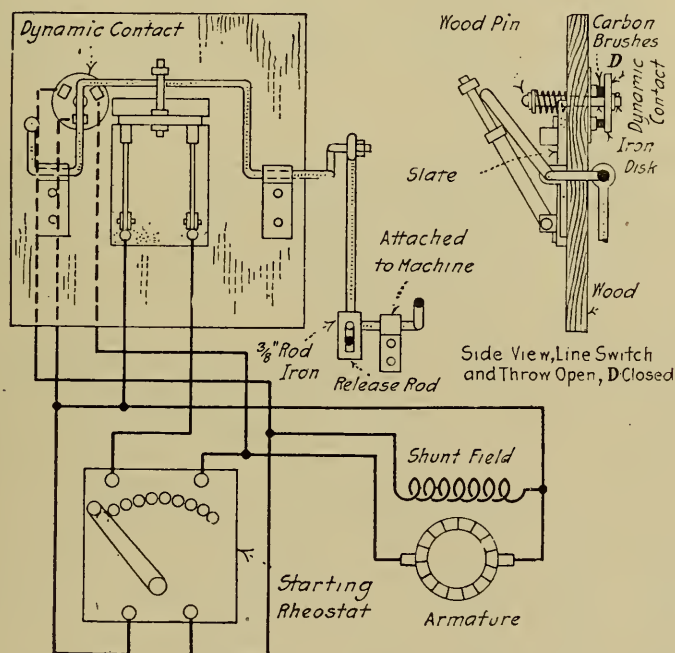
ARRANGEMENT FOR STOPPING DRILL QUICKLY
